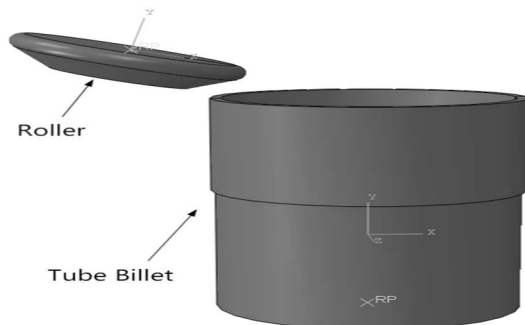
Assembly effect drawing of 3D model of cylinder closure spinning
